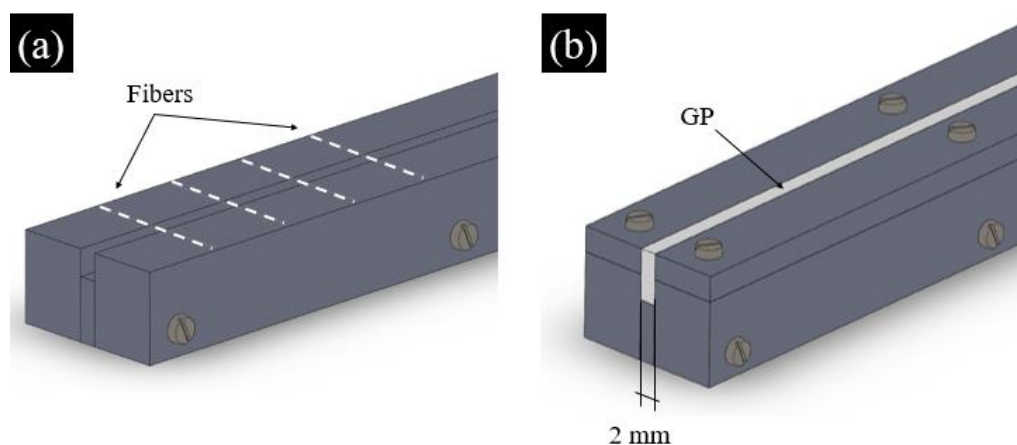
Schematic view of the mold for single-fiber pullout specimens and of the casting process: (a) fibers’ positioning; (b) final assembly after casting.
